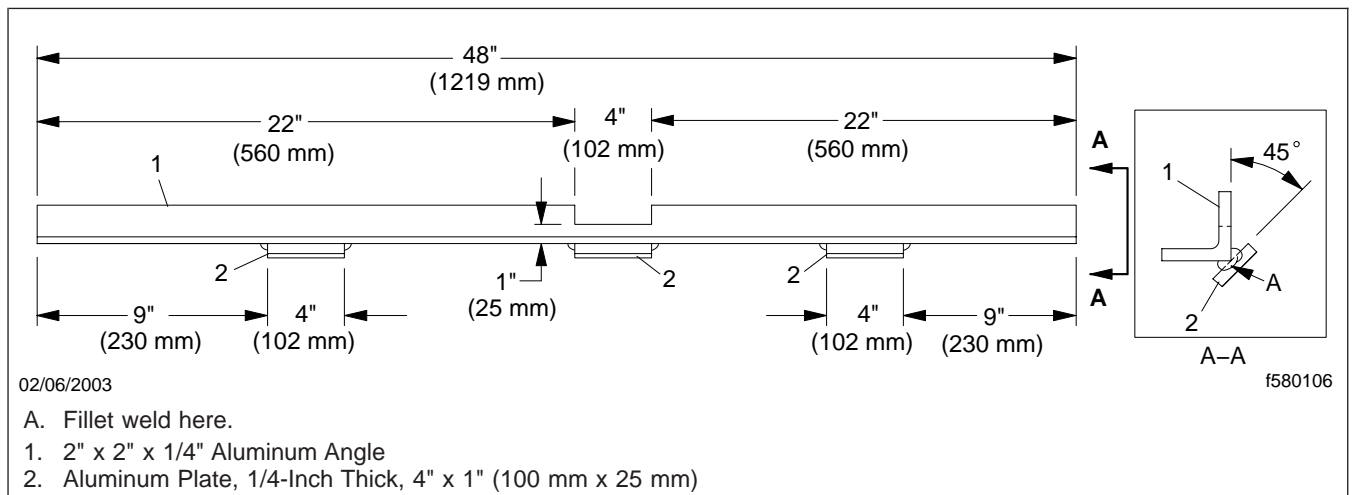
, Special Clamp for Door Frame, Left Side Shown
